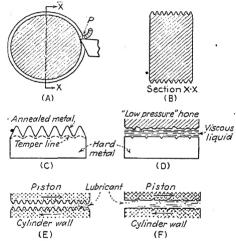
Types of bearing finishes: (A) tearing action of a cutting tool; (B) rough surface from conventional cutting or grinding; (C) effect of tearing action; (D) principle of the "superfinish" process; (E) conventional bearing; (F) "superfinished" bearing. [Sections (C) (D) (E) and (F) greatly enlarged.]
